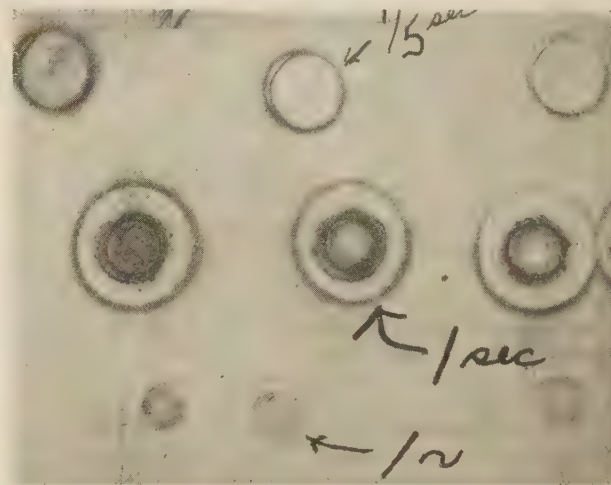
WELDING RESULTS OBTAINED BY USING LONG AND SHORT PERIODS OF DWELL
